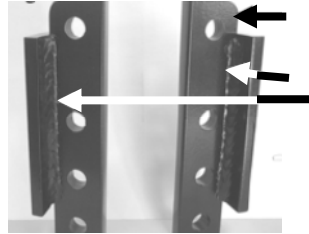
Rounded Edge Up Long Weld Faces Outside
